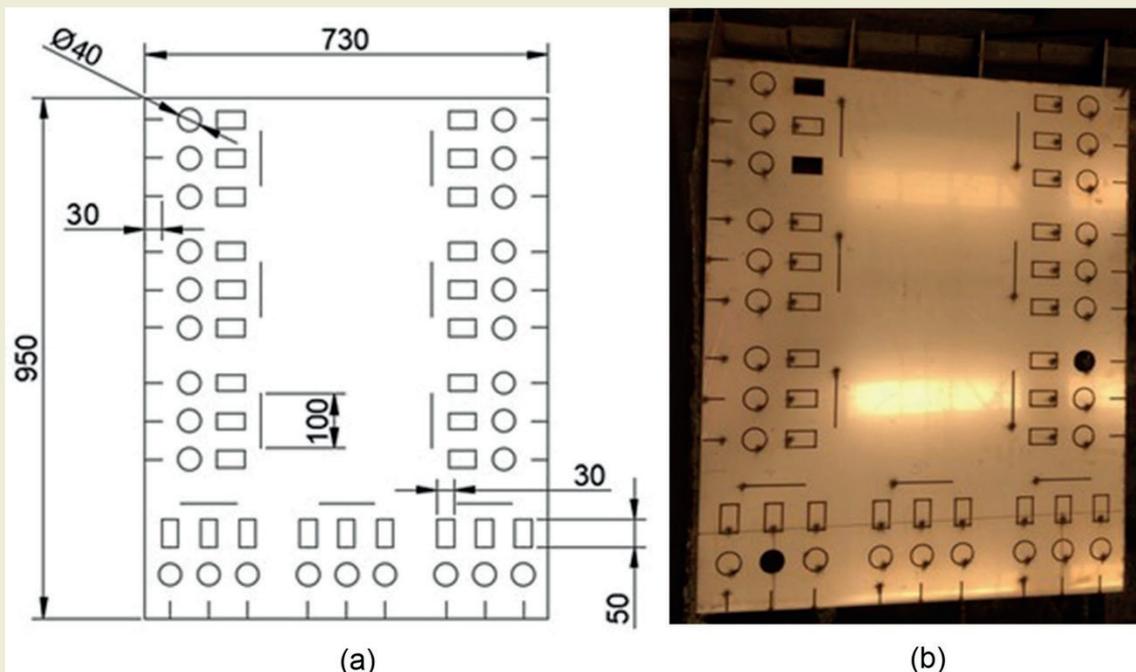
Geometries of the test samples: a) technical drawing and b) processed state with PAC [49]
